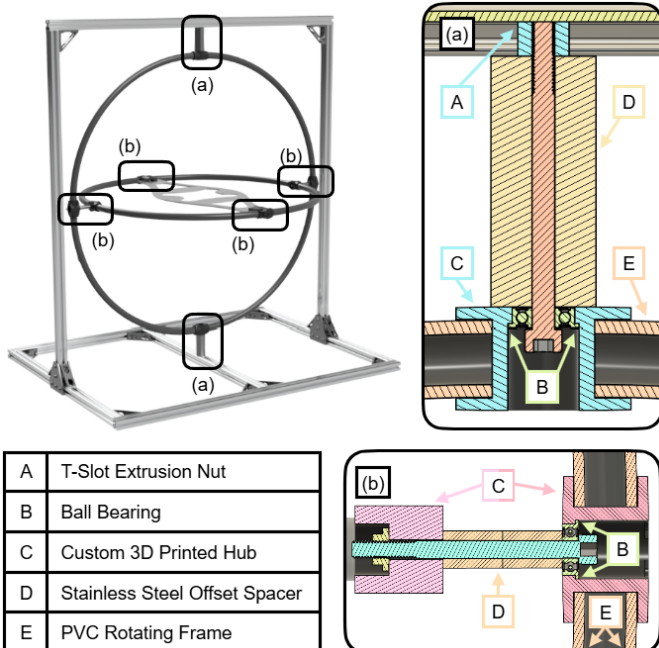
Overview of the testing rig used for restrained flight tests including cross sections of the (a) plate-to-frame joint and (b) plate-to-plate joint.
